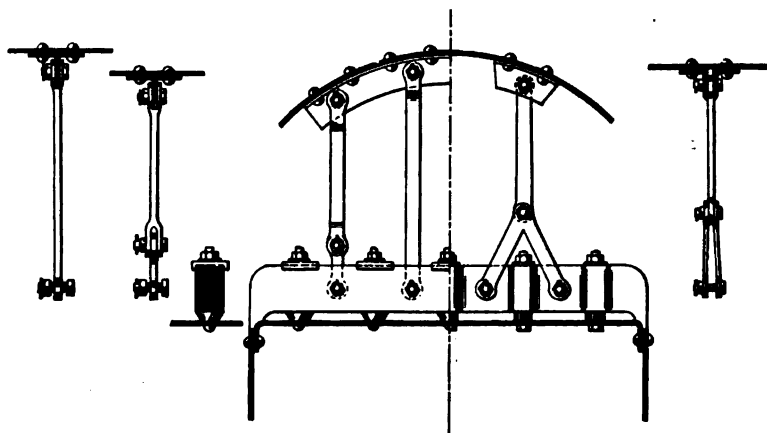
Girder Stay for Supporting Crown-sheet, showing three forms of strengthening stays to shell.
